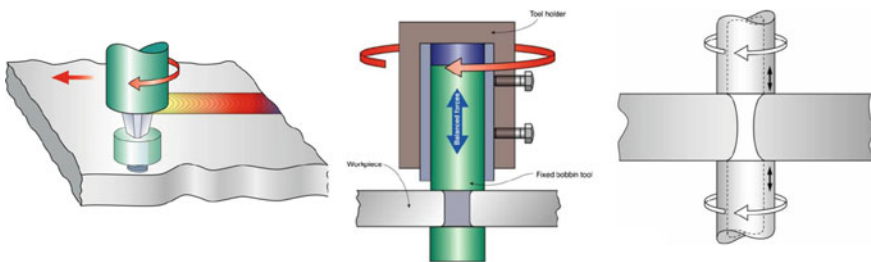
Fixed gap bobbin tool, floating bobbin tool, adaptive bobbin tool [16, 17]
